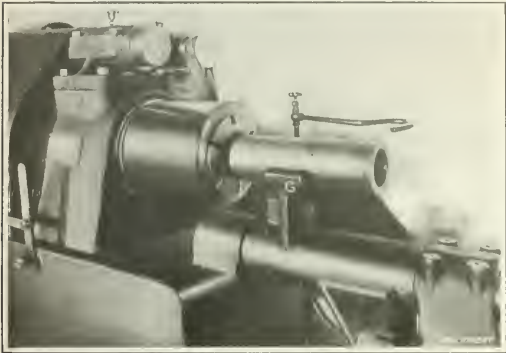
Bracket G in Position to load Shell Forging into Collet
